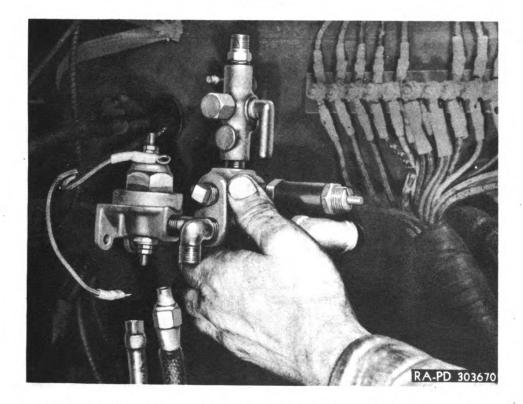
Removing Air Supply Valve, Safety Valve and Low Pressure Indicator Assembly
